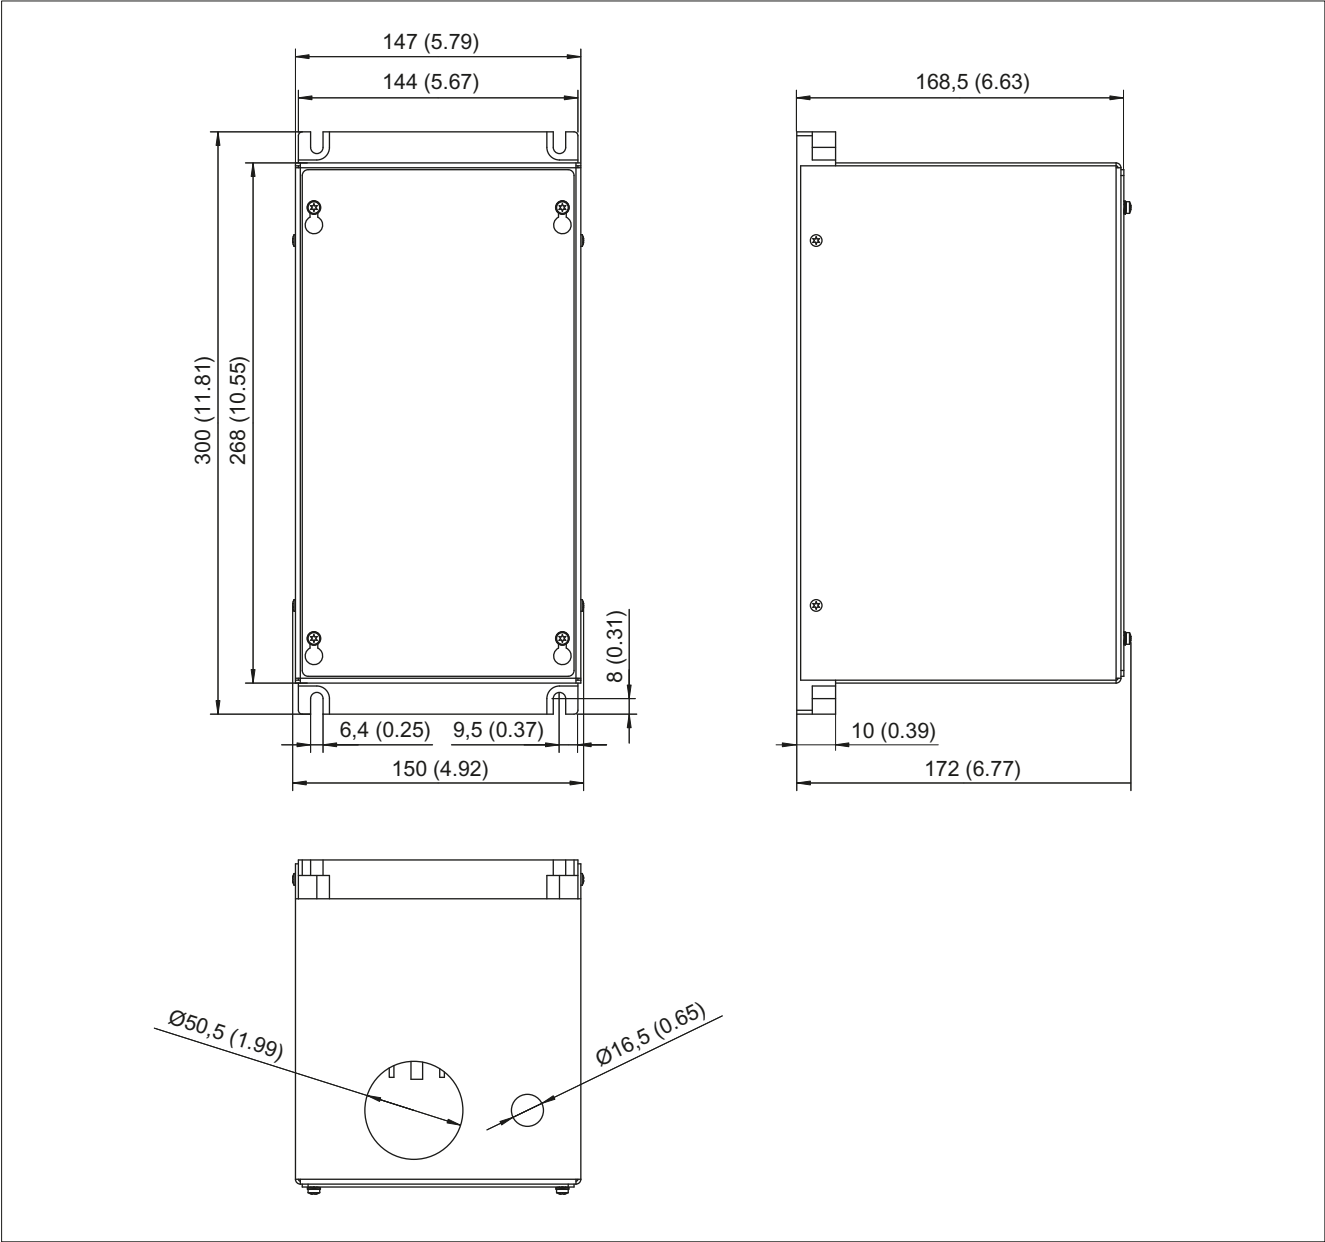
Dimension drawing for VPM 120, all dimensions in mm and (inches)
